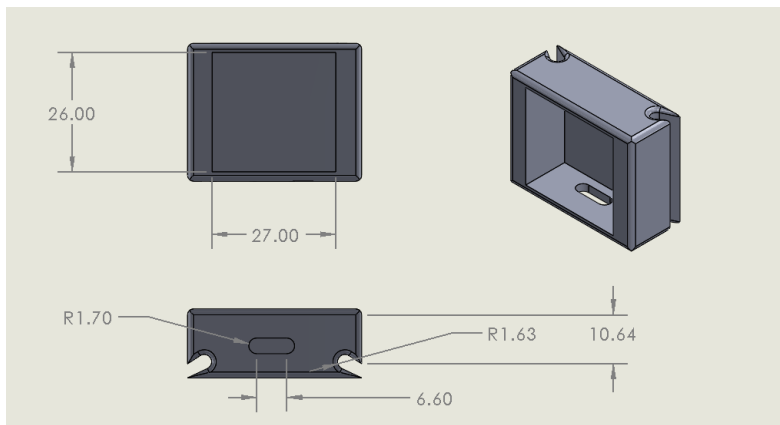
Black resin box CAD image with dimensions (all measurements in mm)
